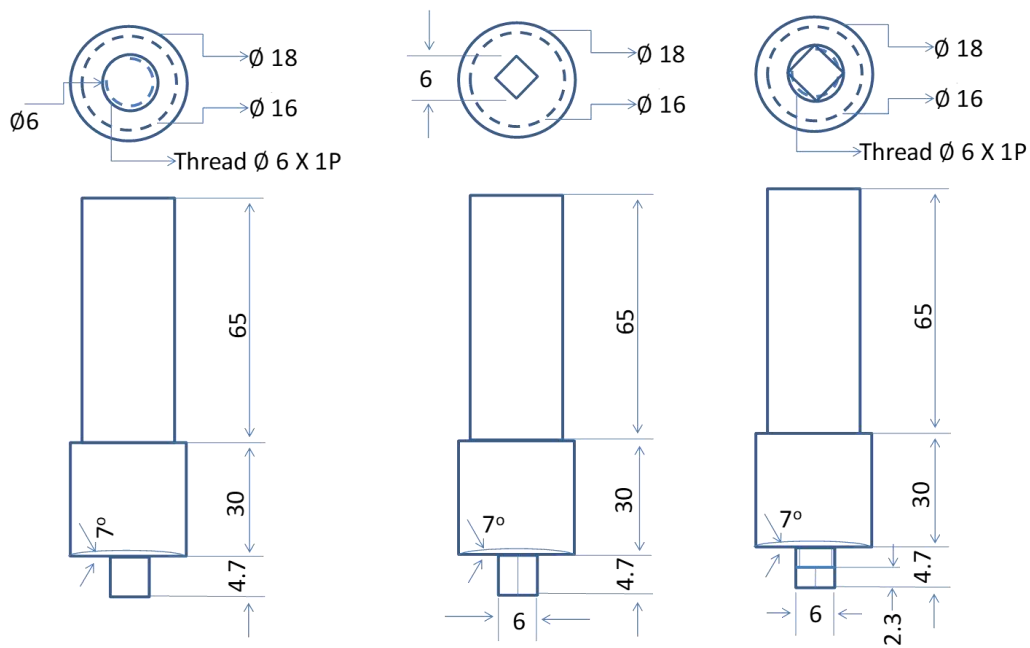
Friction Stir Welding tool with a) Threaded cylindrical pin, b) Square pin, and c) Combination of Square and Threaded cylindrical pin.
